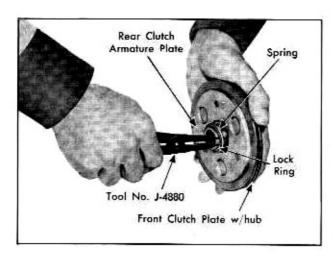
A-8 Removing Clutch Plate Snap Ring
